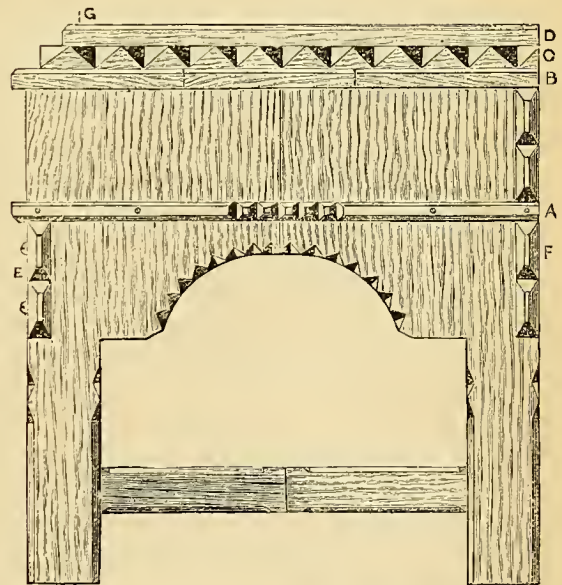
STAND FOR DRAWERS—END ELEVATION.
